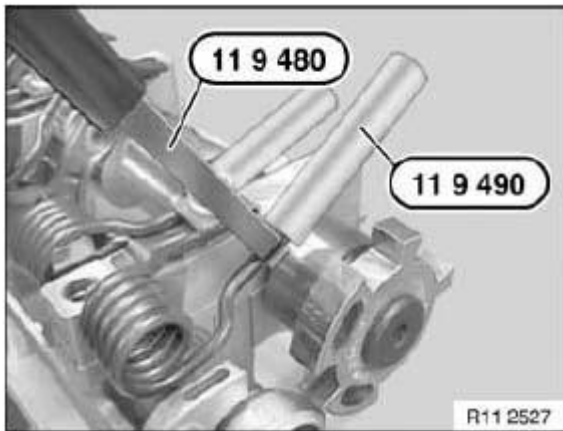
Identifying Special Tool (11 9 480) And (11 9 490)
